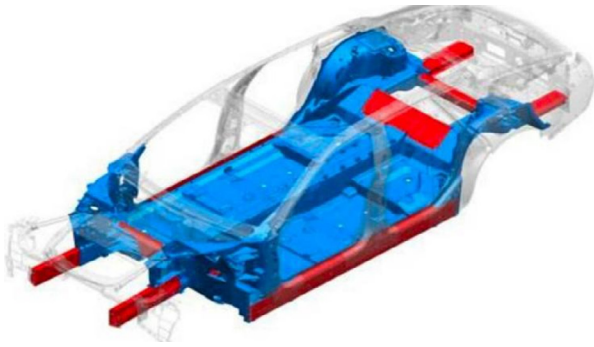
Six mega aluminum shape castings forming the entire lower body structure for Cadillac Celestiq vehicles^[13]
